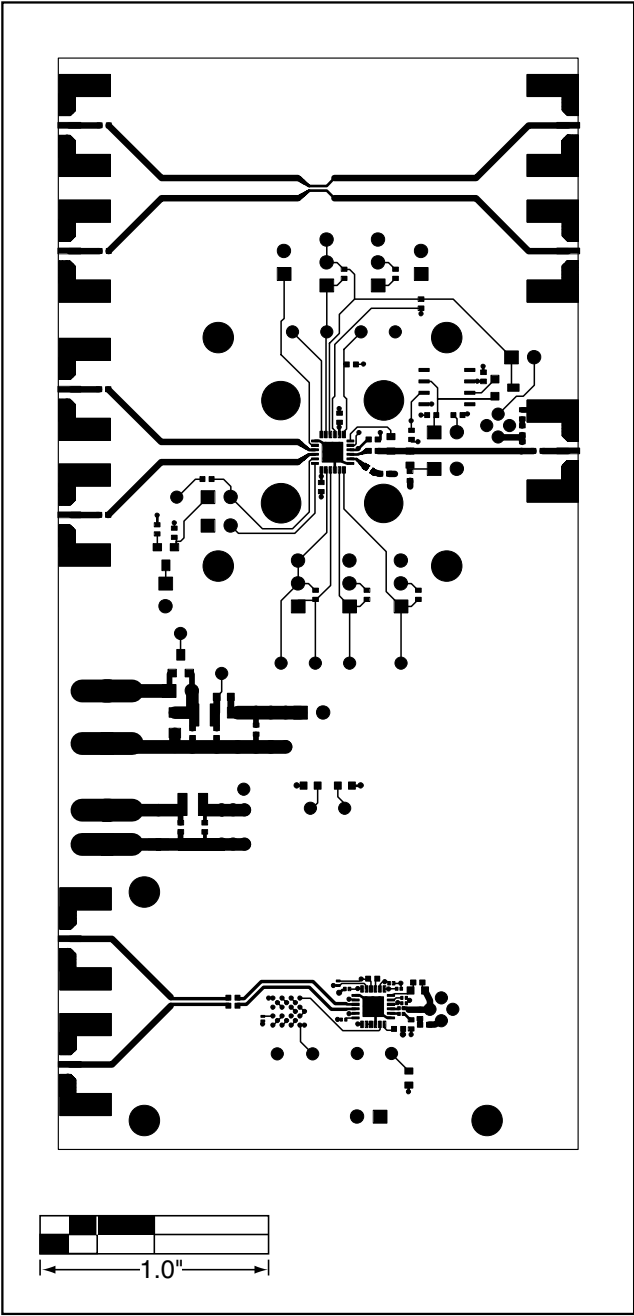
MAX3740 EV Kit PC Board Layout—Component Side
